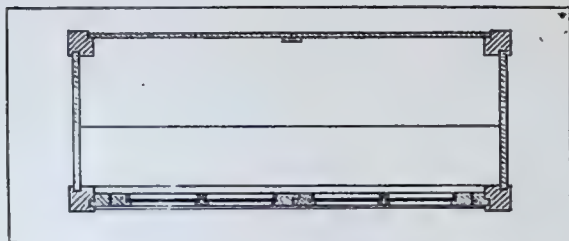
SECTIONAL PLAN, SHOWING TOP.
